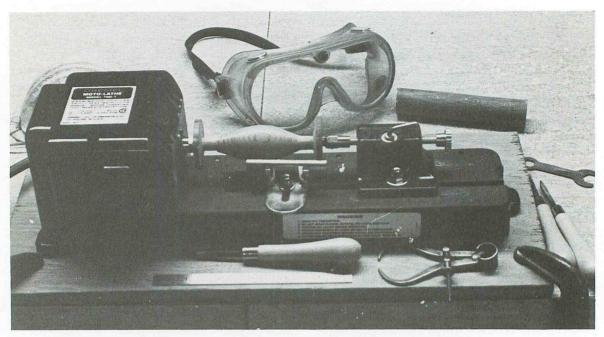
Dremel Moto-Lathe with partially completed handle for clock spring release tool.
